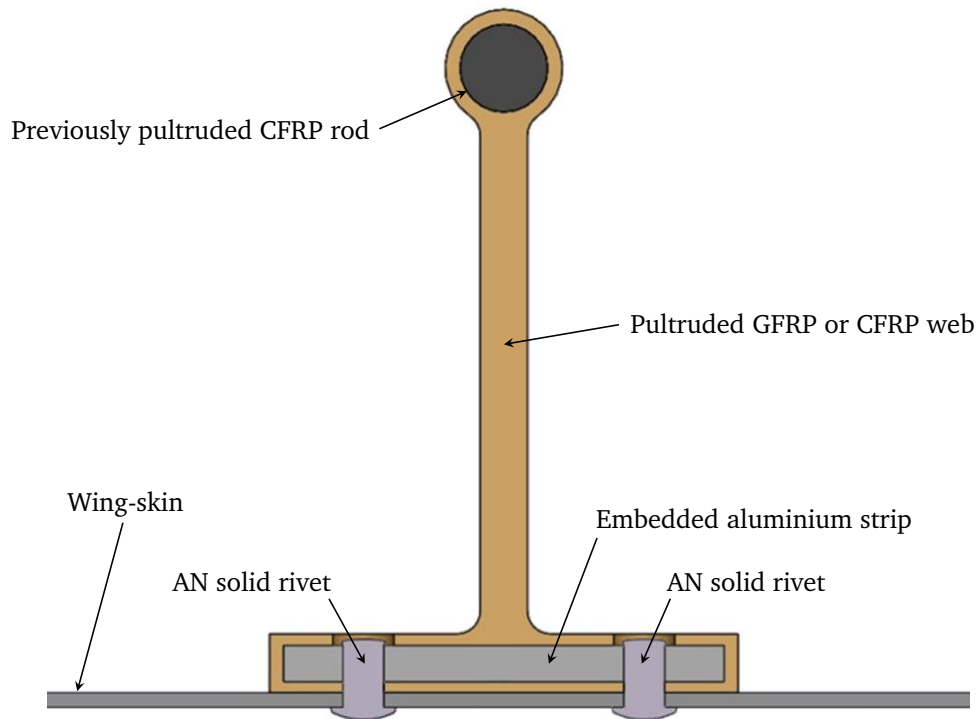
Cross-sectional rendering of T-section hybrid composite co-pultruded aircraft wing-stringer. Note that this figure shows the proposed wing-stringer riveted to a wing-skin, utilizing the embedded aluminium strip as an integral hard-point to accept the AN solid rivets.
